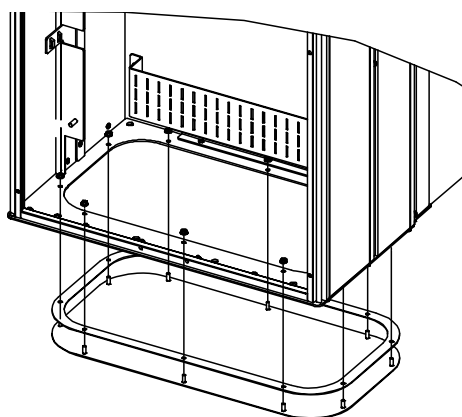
Mounting of bottom plate, 51 Unit Size .
